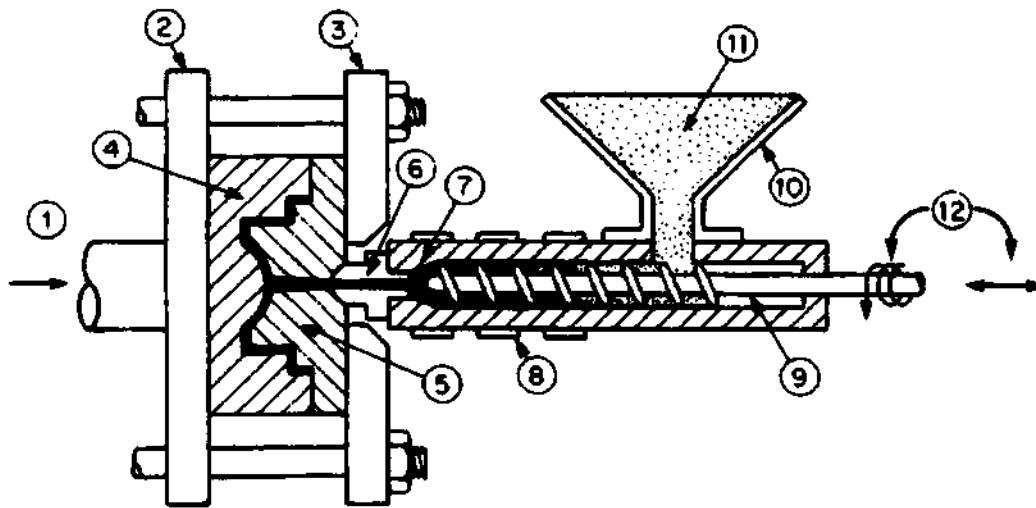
C1 Schematic illustration of injection molding. (1) Mold clamping force. (2) Movable mold platen. (3) Fixed platen. (4) Cavity half of mold. (5) Force half of mold. (6) Nozzle. (7) Cylinder. (8) Electric band heaters. (9) Reciprocating screw. (10) Hopper. (11) Granulated-plastic material. (12) Rotary and reciprocating motion of screw. (from Bralla, *Design of Manufacturability Handbook*<sup>6</sup>.)
